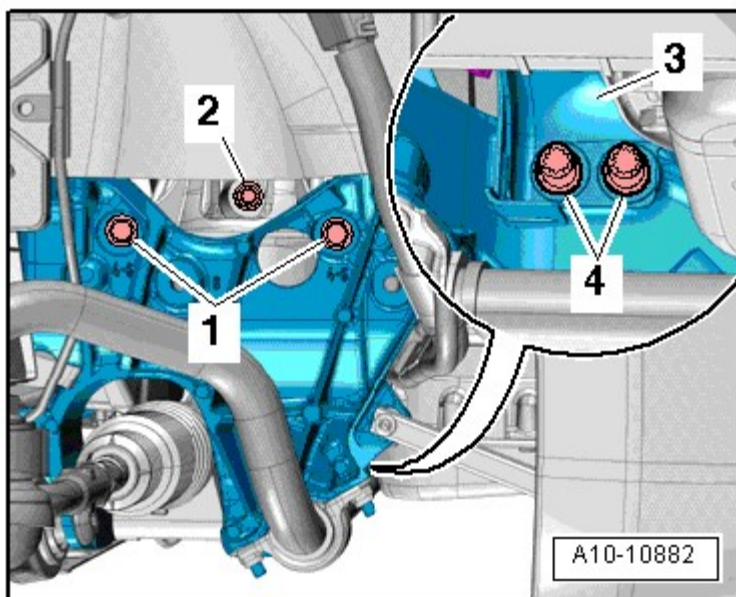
Identifying Bolts And Right Engine Mount Retaining Plate
